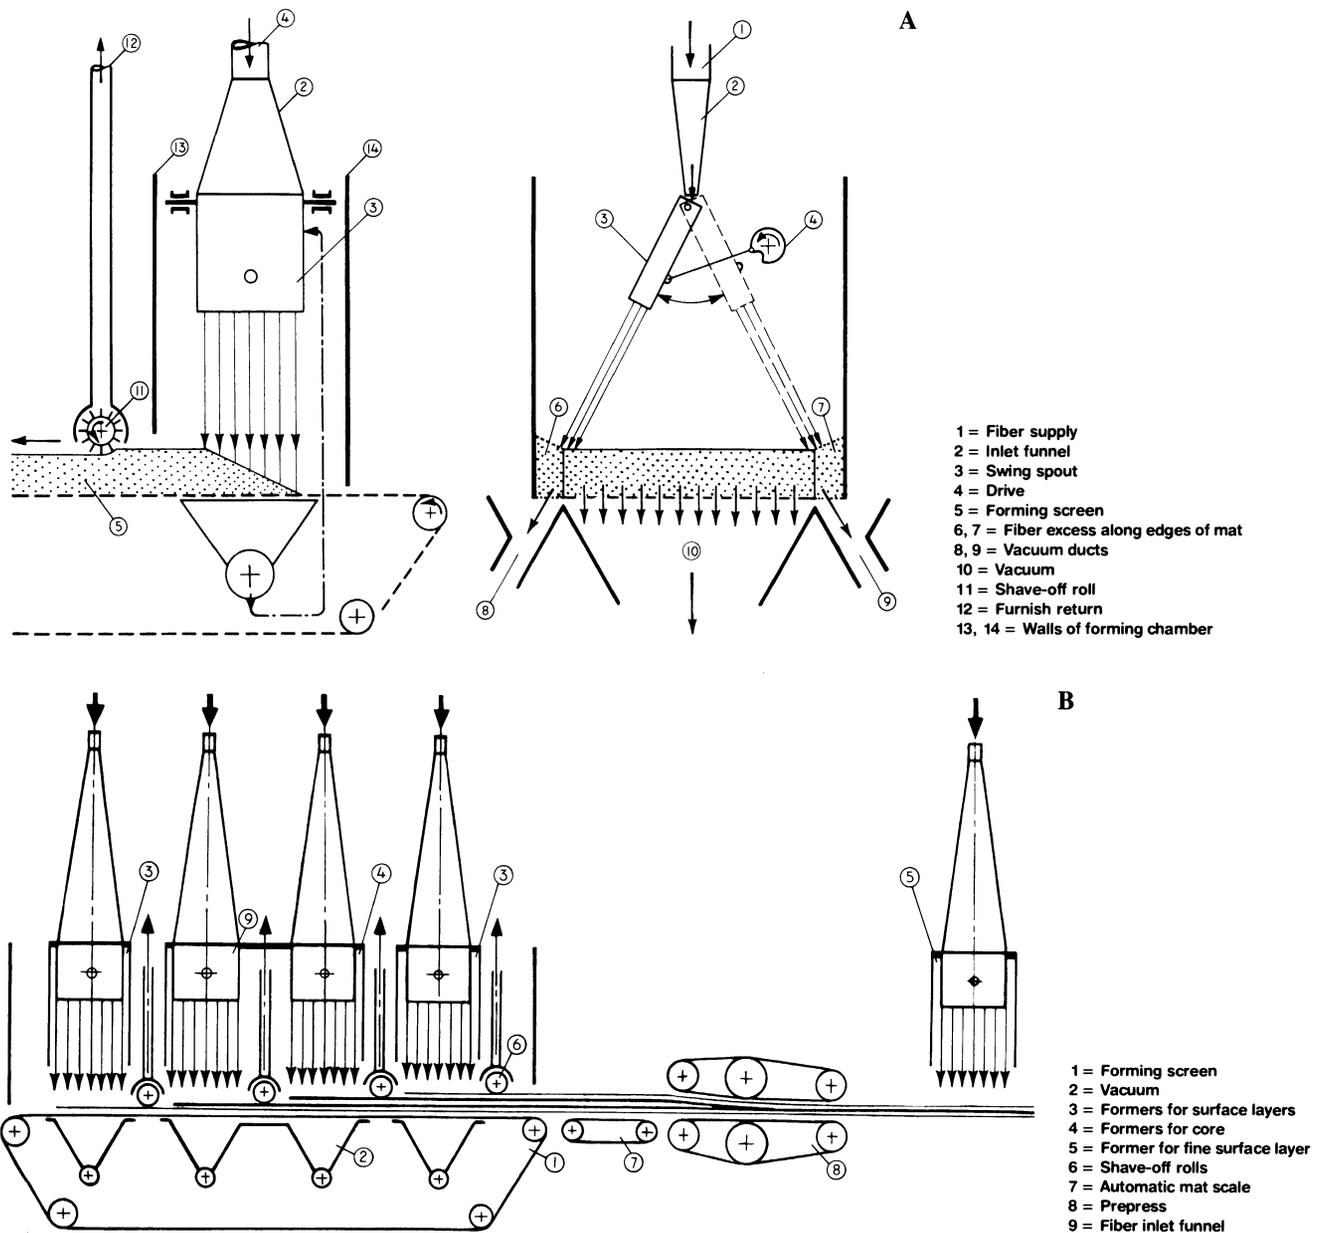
Vacuum former with swing spouts (Lampert 1967). A—Schematic of swing spout former element. B—Four-stage vacuum former with element for forming fine surface layer.
